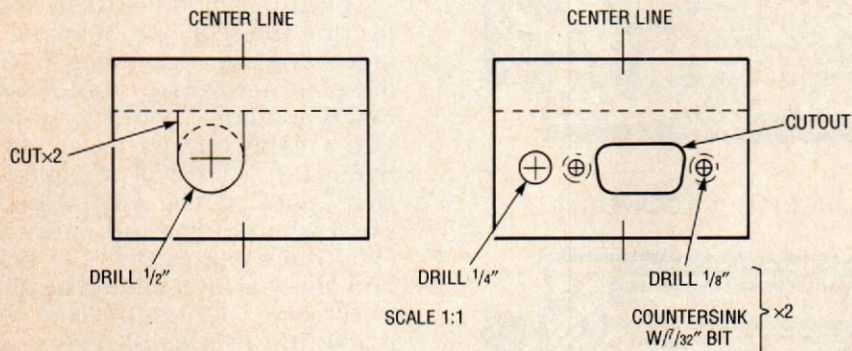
DRILLING TEMPLATE. If you use our board and the box mentioned in the parts list, drill the box as shown here.
